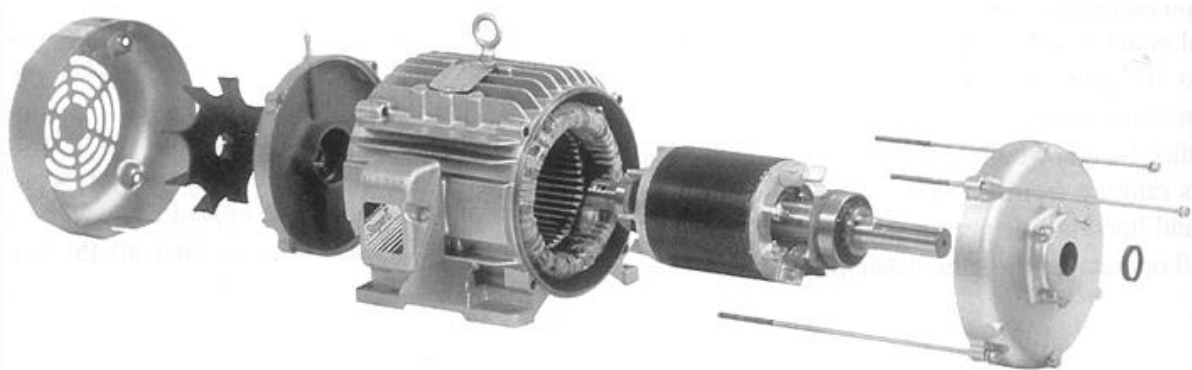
Exploded view of a squirrel cage induction motor showing stator, rotor, end-bells, cooling fan, ball bearings and terminal box [12]
